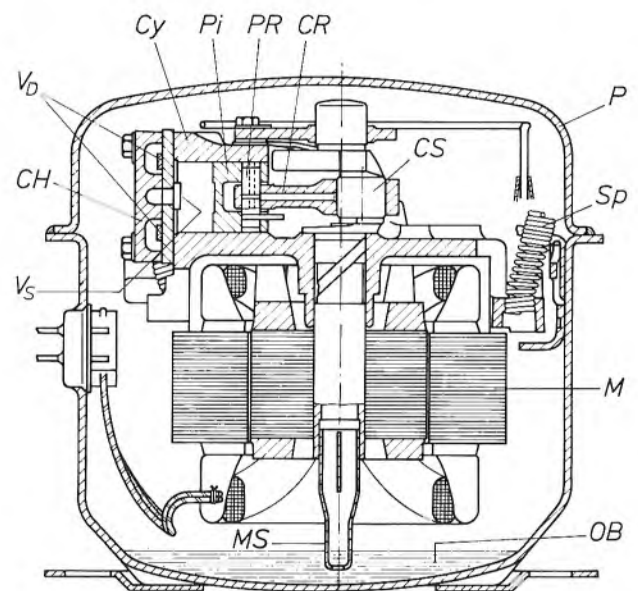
The compressor unit. V_S inlet valve. CH cylinder head. V_D outlet valve. Cy cylinder. Pi piston. PR gudgeon pin. CR connecting rod. CS crankshaft. P shell. Sp spring. M motor. OB oil bath. MS hollow motor shaft with 'oil pump': the opening widens towards the top.
